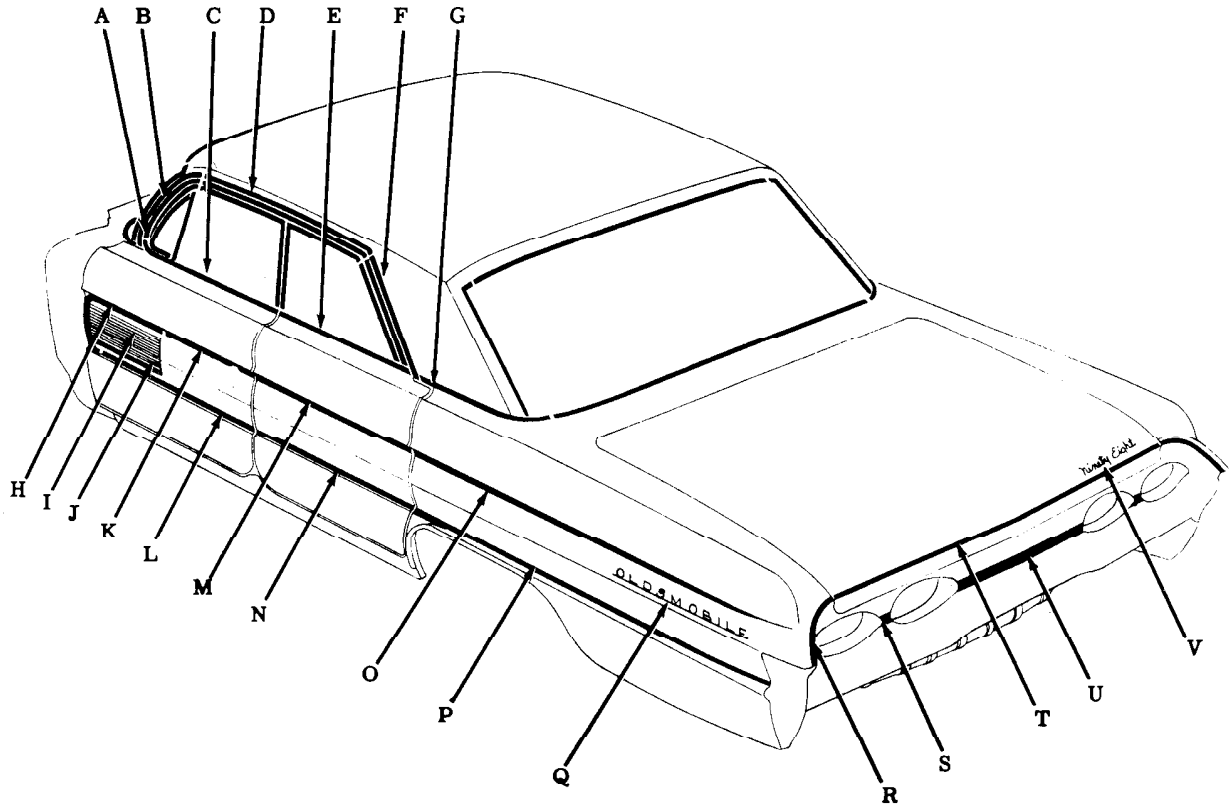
Exterior Moldings (3819, 3829 Styles)
